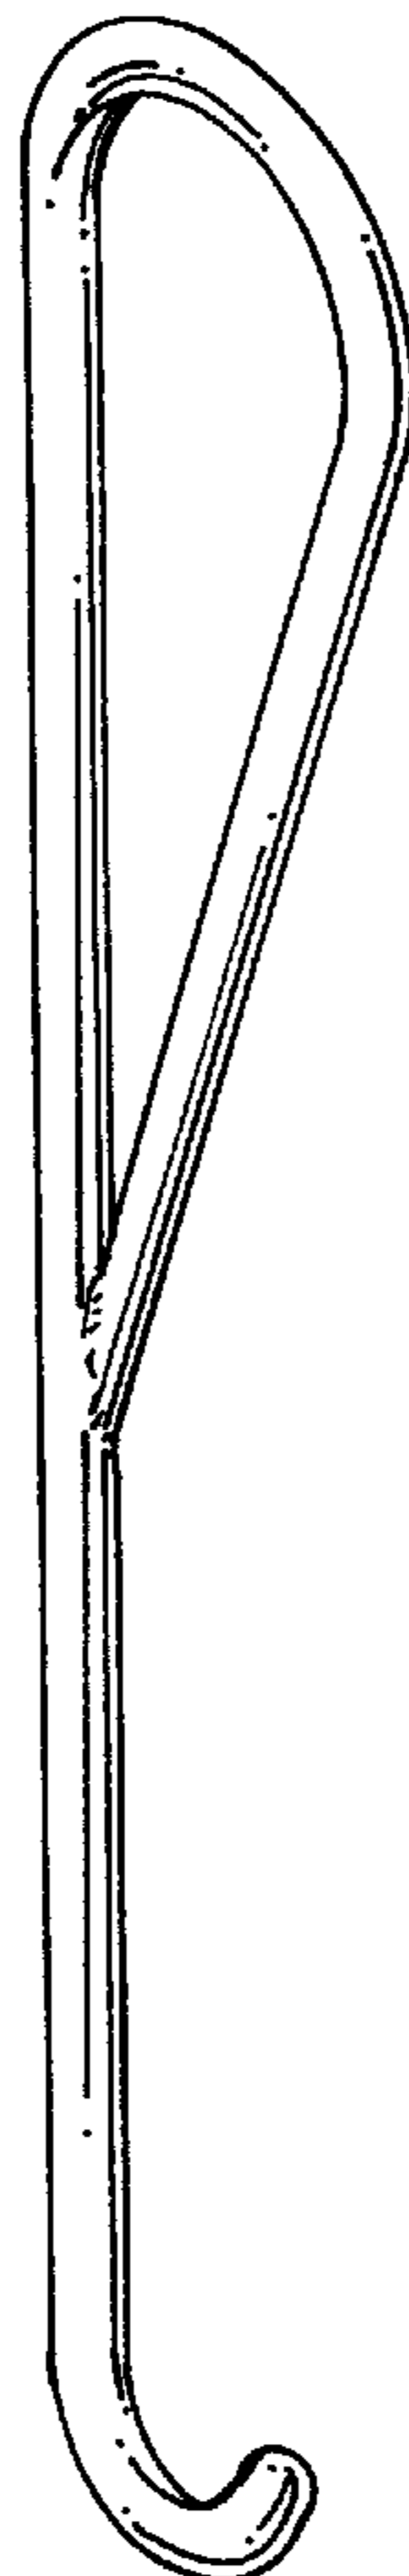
is a front elevational view of the apparatus shown in FIG. 1;
